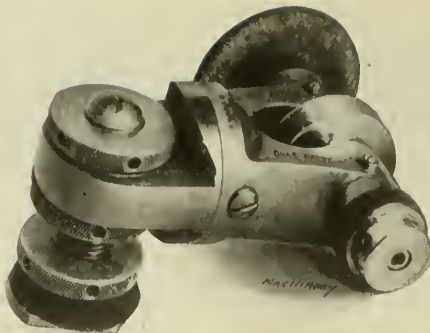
Grinding Attachment for Bench Lathe built by Charles Hardy
